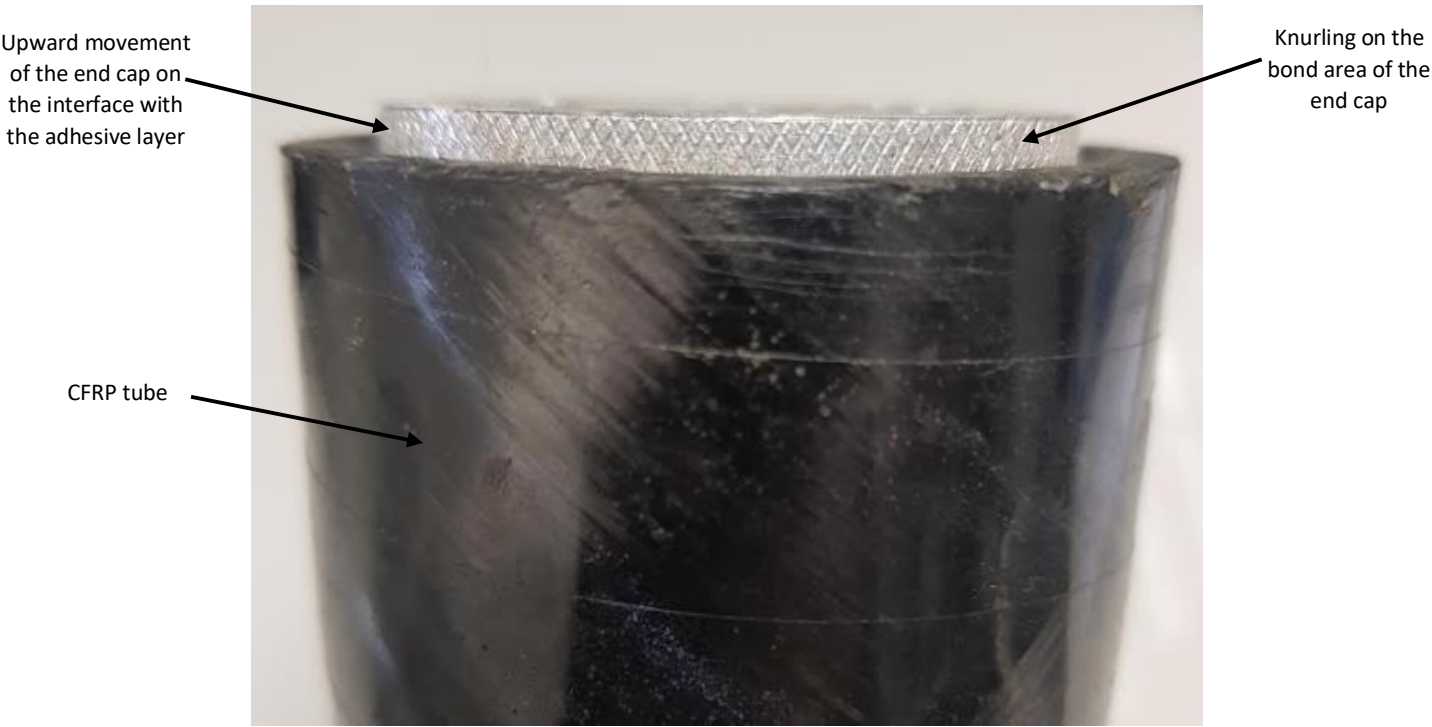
Photograph showing shear failure on the end cap to adhesive layer interface for a 4 mm vessel
